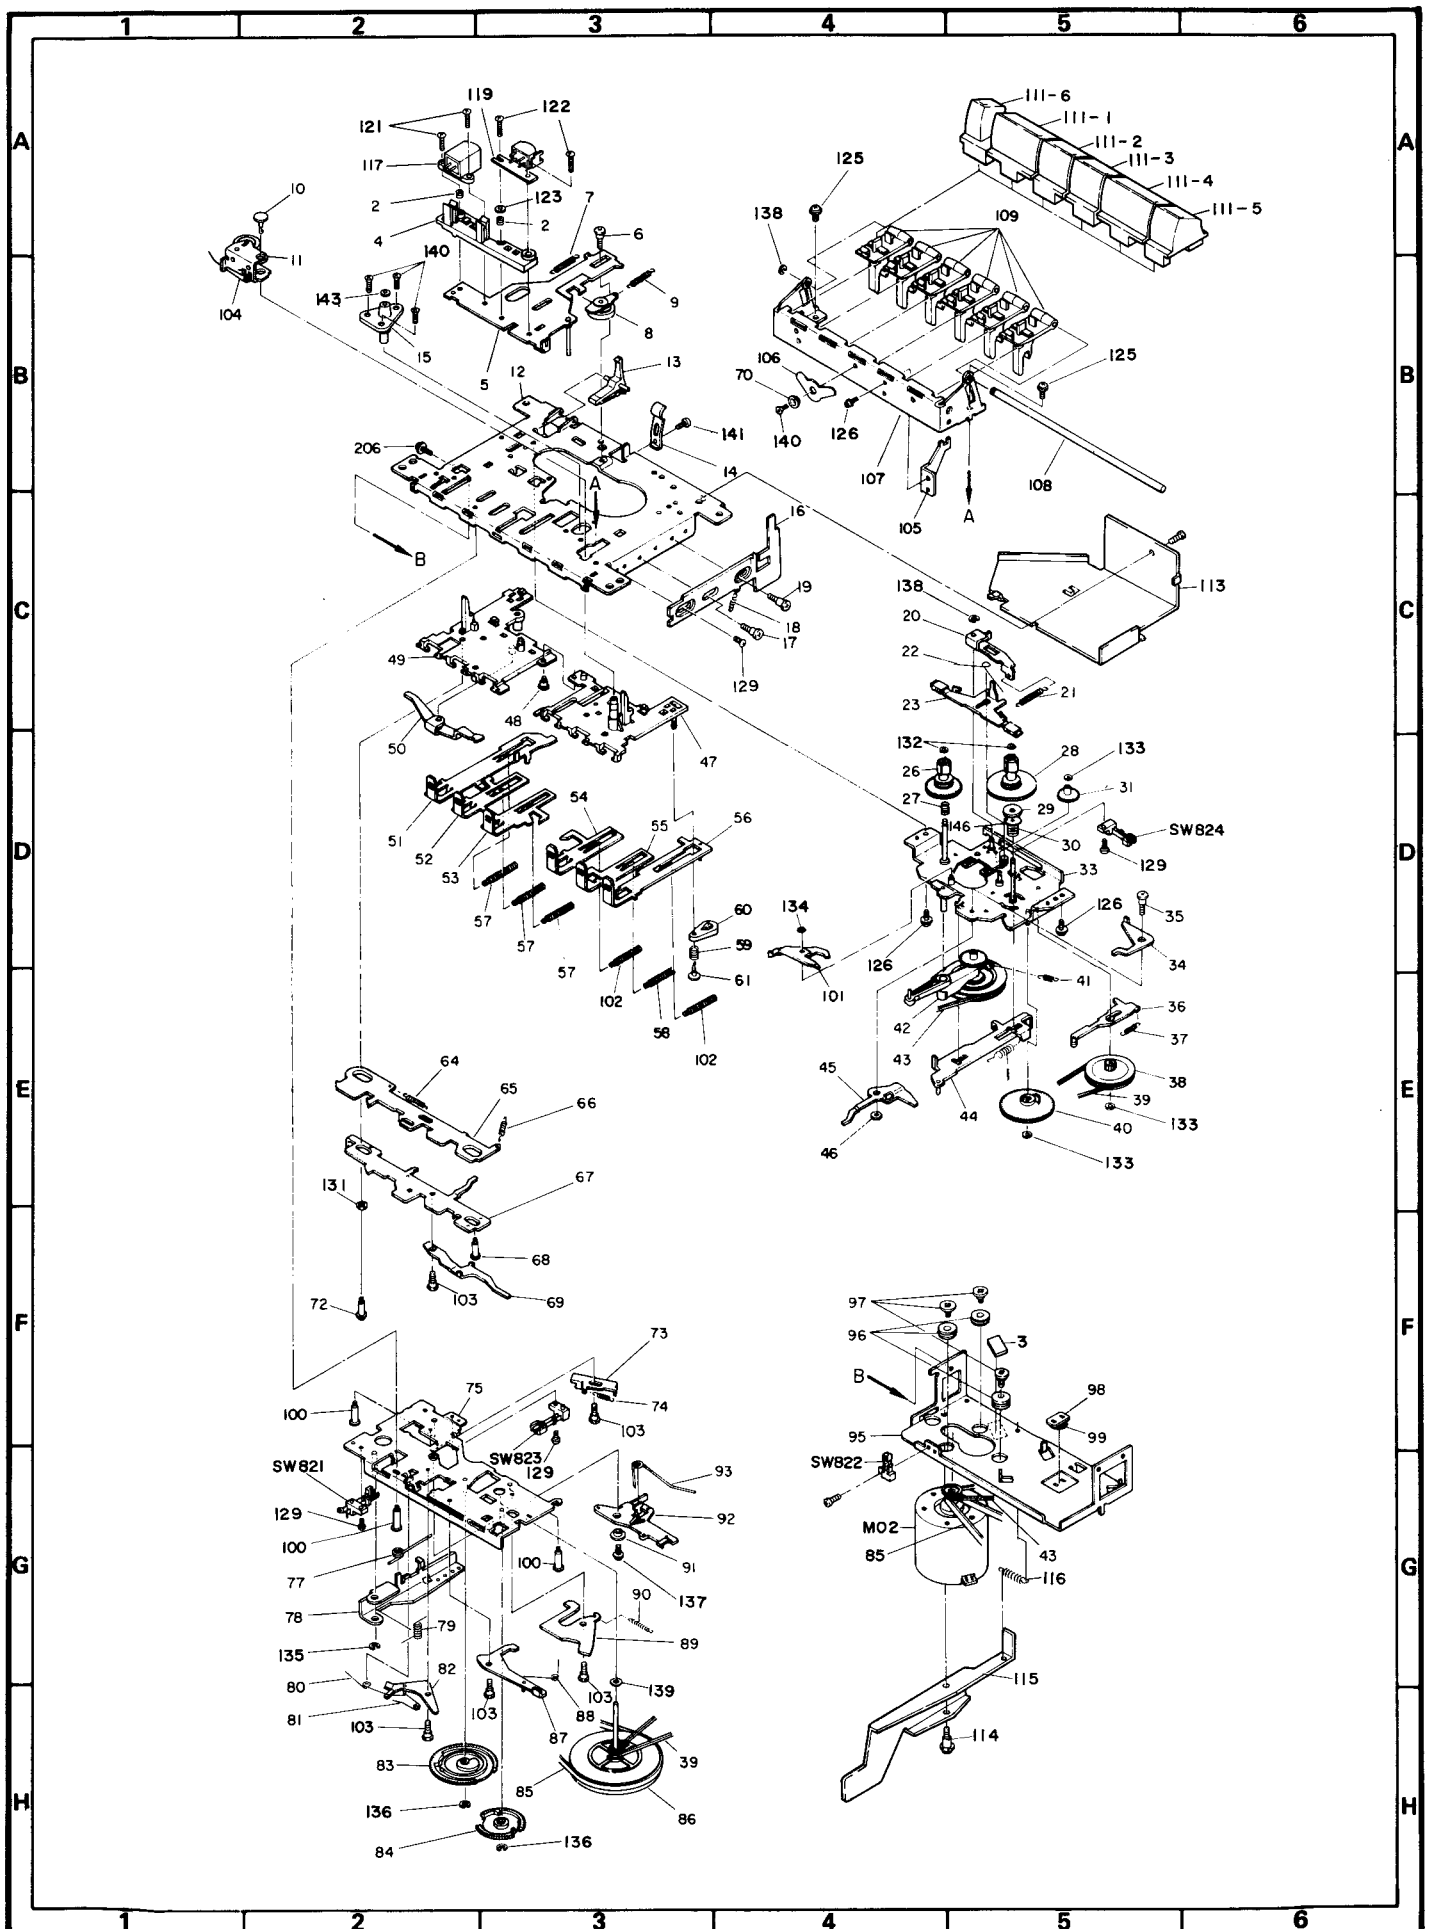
MECHANISM EXPLODED VIEW (DECK 2)
